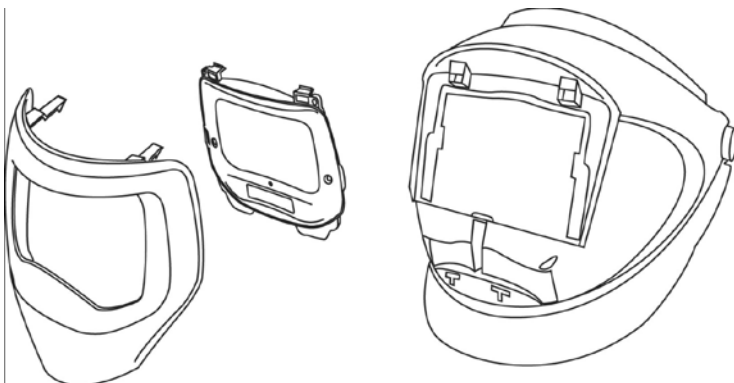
Exploded Assembly Drawing with 9100 ADF
